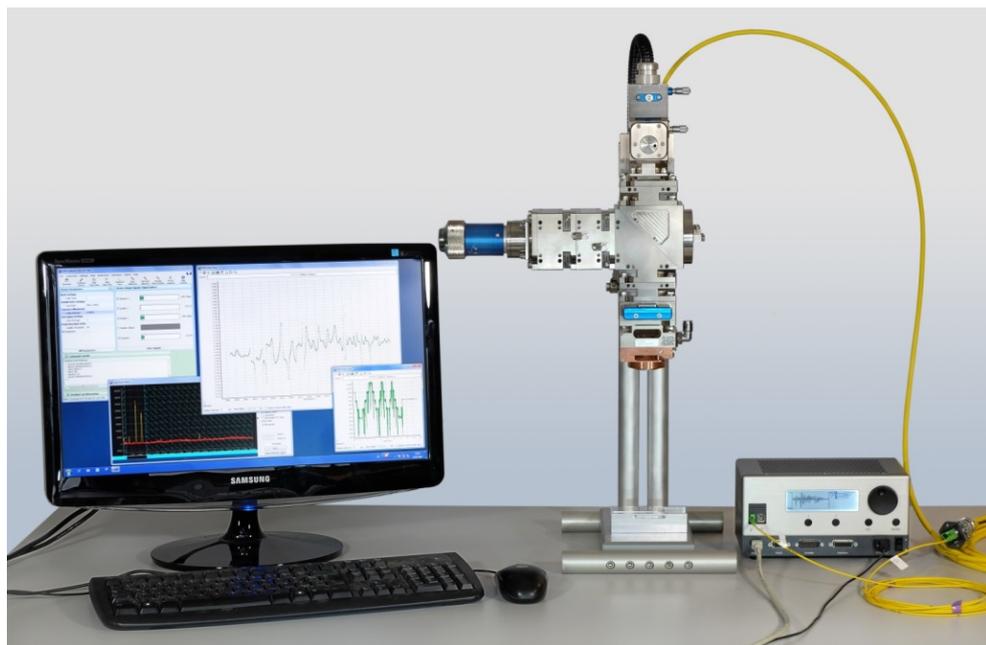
IDM sensor system adapted to a commercially available laser welding head.
